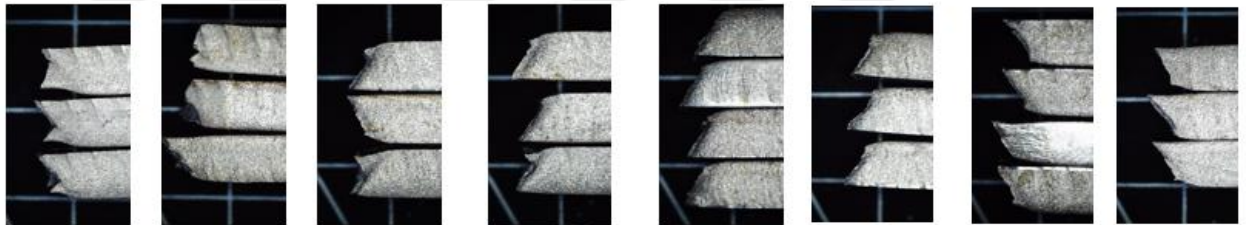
16: Side Views of Fracture Surfaces.
